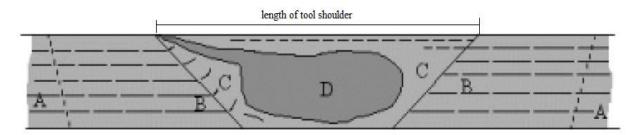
Various micro structural regions in the transverse cross section of a friction stir welded material. A, unaffected material or parent metal; B, heat-affected zone; C, thermo mechanically affected zone; D, weld nugget
